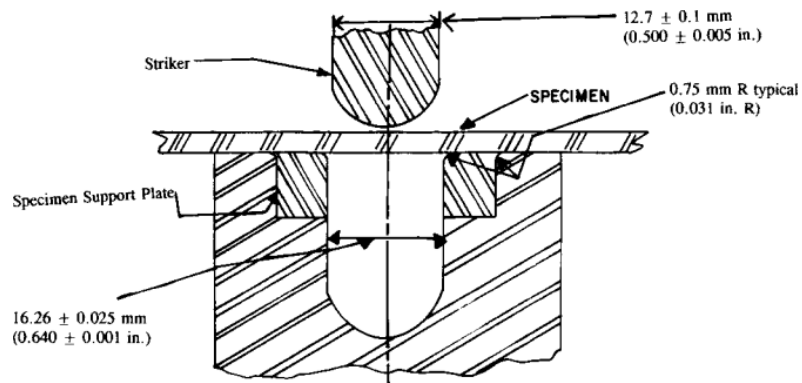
Striker/Specimen/Support Plate Configuration for Geometries GB and GC (Geometry GC Shown)
